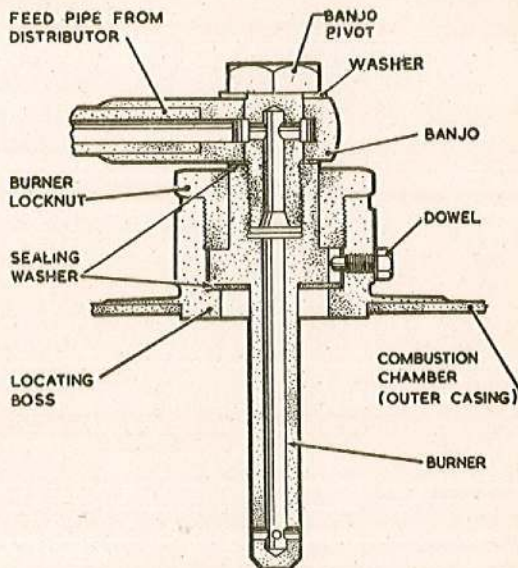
Sectioned view of burner fitted to locating boss in combustion chamber
